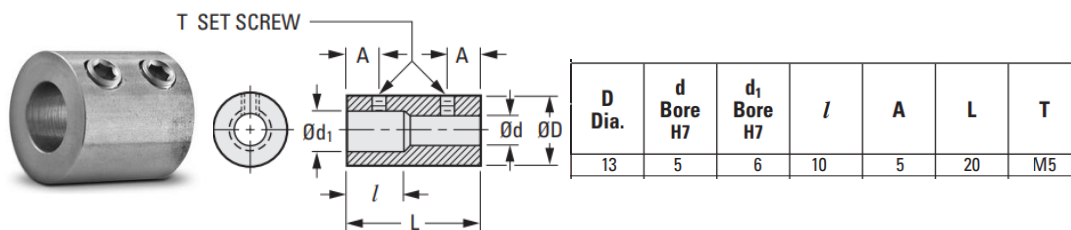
Coupling A: Motor to gearbox: Specifications [11]
